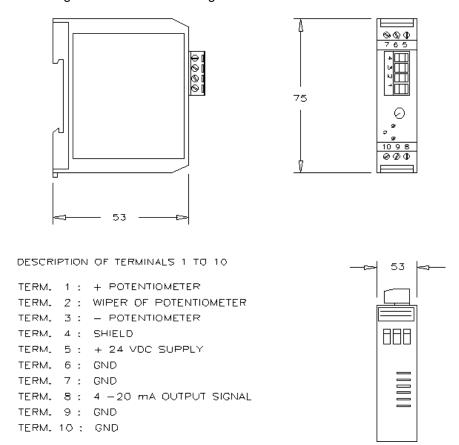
Outline Drawing of the 4–20 mA Converter Box of the Terminal Shaft Indicator
